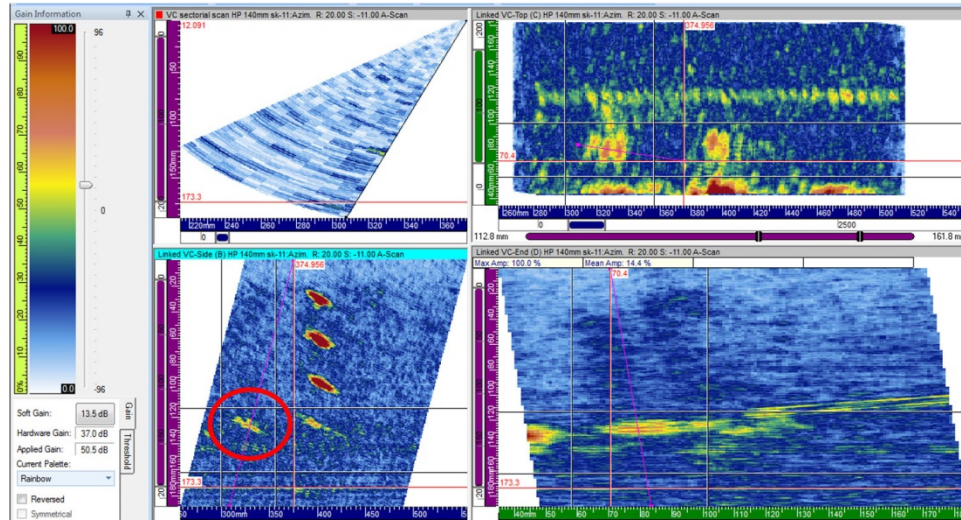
CW, Skew 11, Axial Flaw 1, Circled in Red
